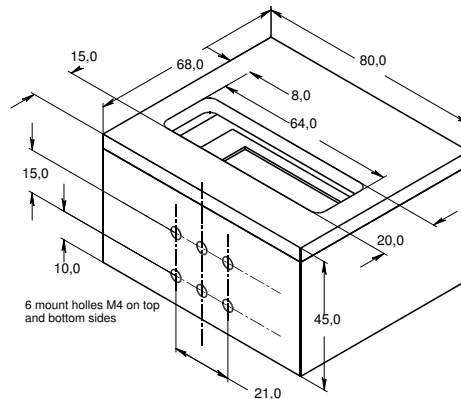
Technical drawing of the package and mounting holes of the linear MMDM
